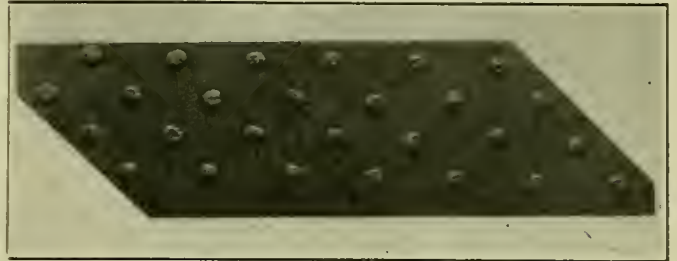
Corrugations on Deck Plate Built Up by Arc Welding
